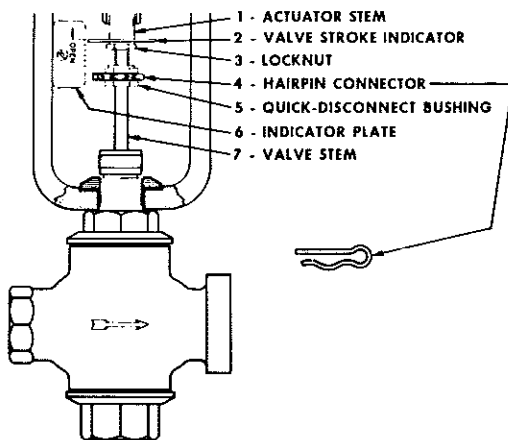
VALVE STEM STROKE ADJUSTMENT
